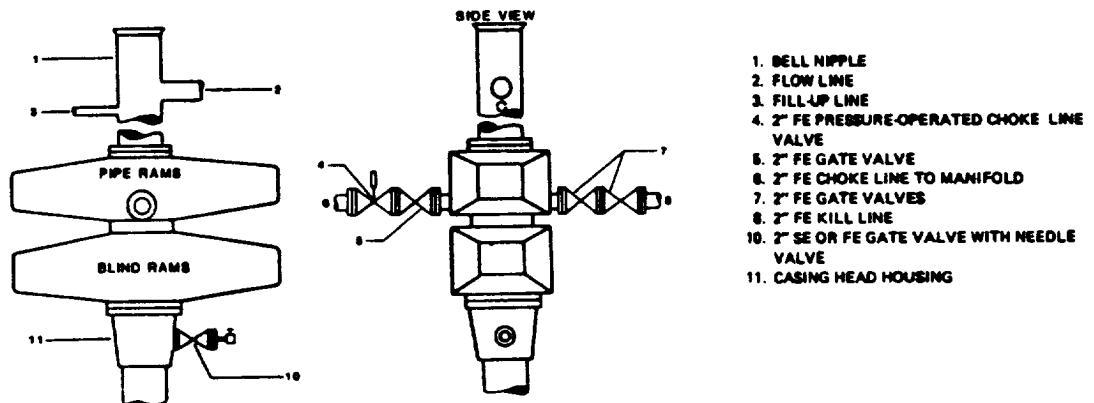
Standard Hydraulic Blowout Preventer Assembly (2 M or 3 M Working Pressure) Alternative 3 (without Drilling Spool)
